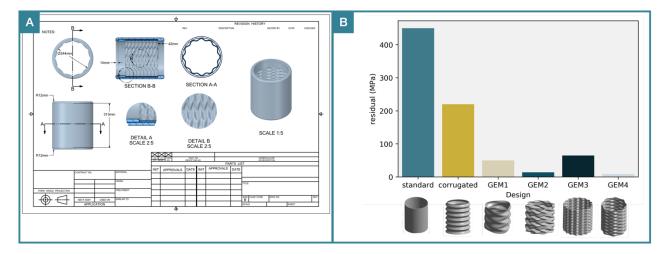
Geometrically enhanced metamaterial flexible connector (GEM-Flex). (A) Technical schematic for GEM-Flex. Dimensions displayed are for a 9-5/8" outer diameter casing. (B) Geometric optimization of tubular shapes determines the number of azimuthal and axial convolutions as well as pitch and amplitude of corrugations. Parametric analysis is performed on the GEM-Flex interior surface to determine which geometry performs best when compared to L80 tubulars and L80 corrugated bellows. Shown here is the simulated residual stress in the part after thermal loading from 22°C to 350°C and back.
